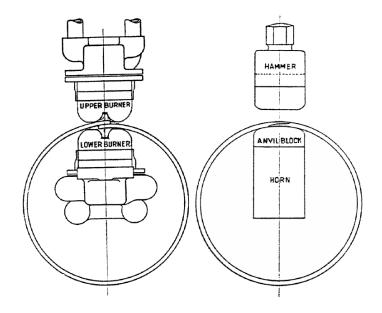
Manufacturing Process for Hammer Weld (Image from History of Line Pipe Manufacturing in North America)
